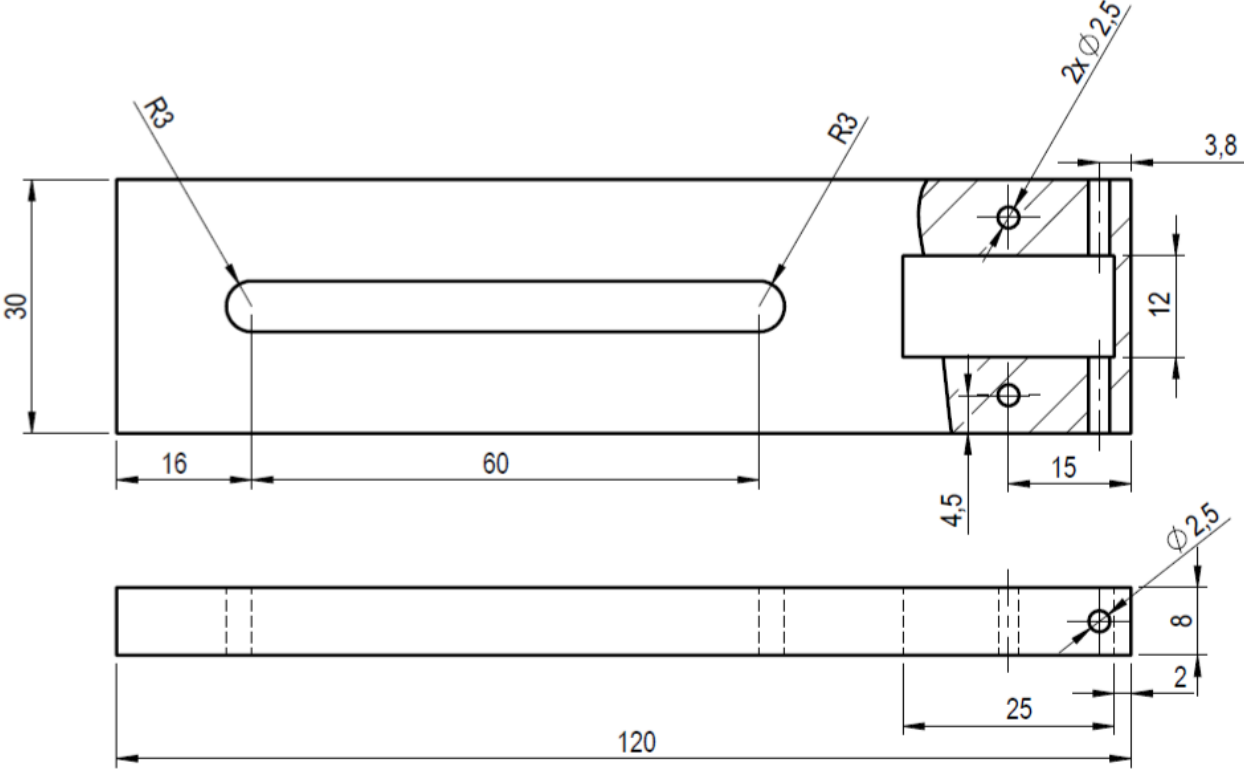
Technical drawing of Plate 3 (vertical plate of the guiding system).
